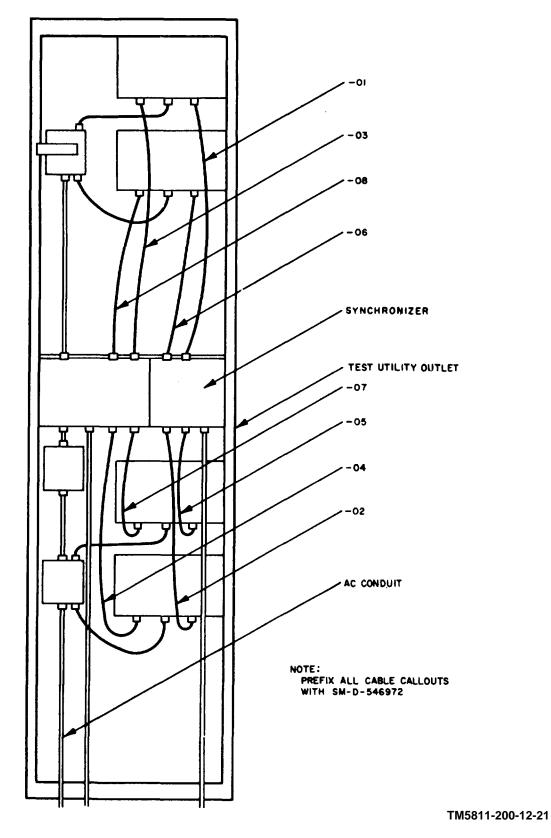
REAR VIEW OF SPECIAL 19-INCH RACK, COVER REMOVED, SHOWING ROUTING OF CABLES.
